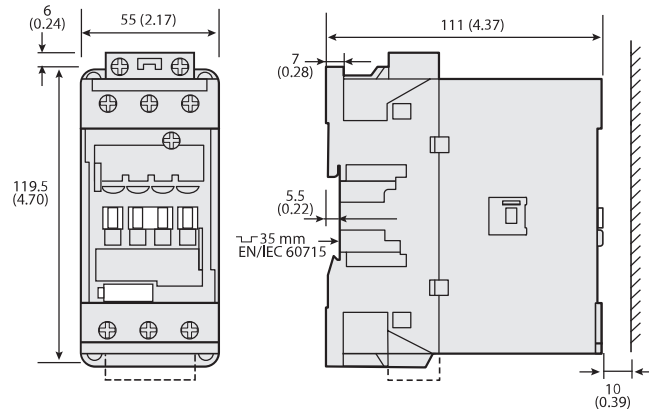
100-E40...100-E65 3-Pole Contactors with Front-mounted Auxiliary Contact
